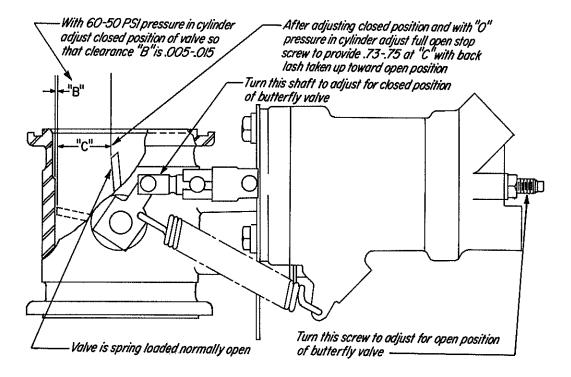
Exhaust Bypass Valve - Open and Closed Clearances
